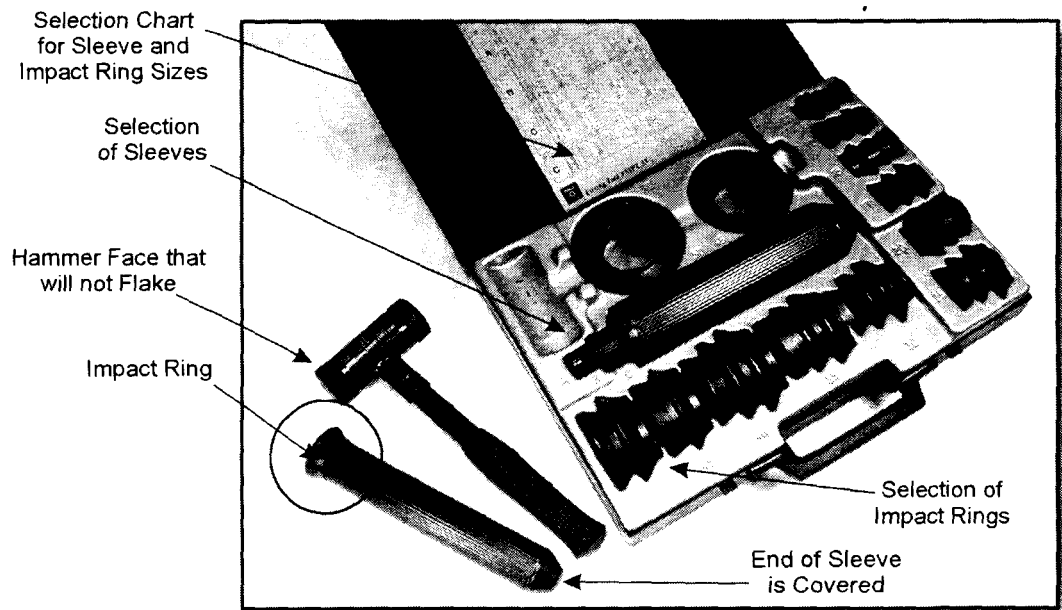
Drive sleeves. (Courtesy SKF Canada Limited)
